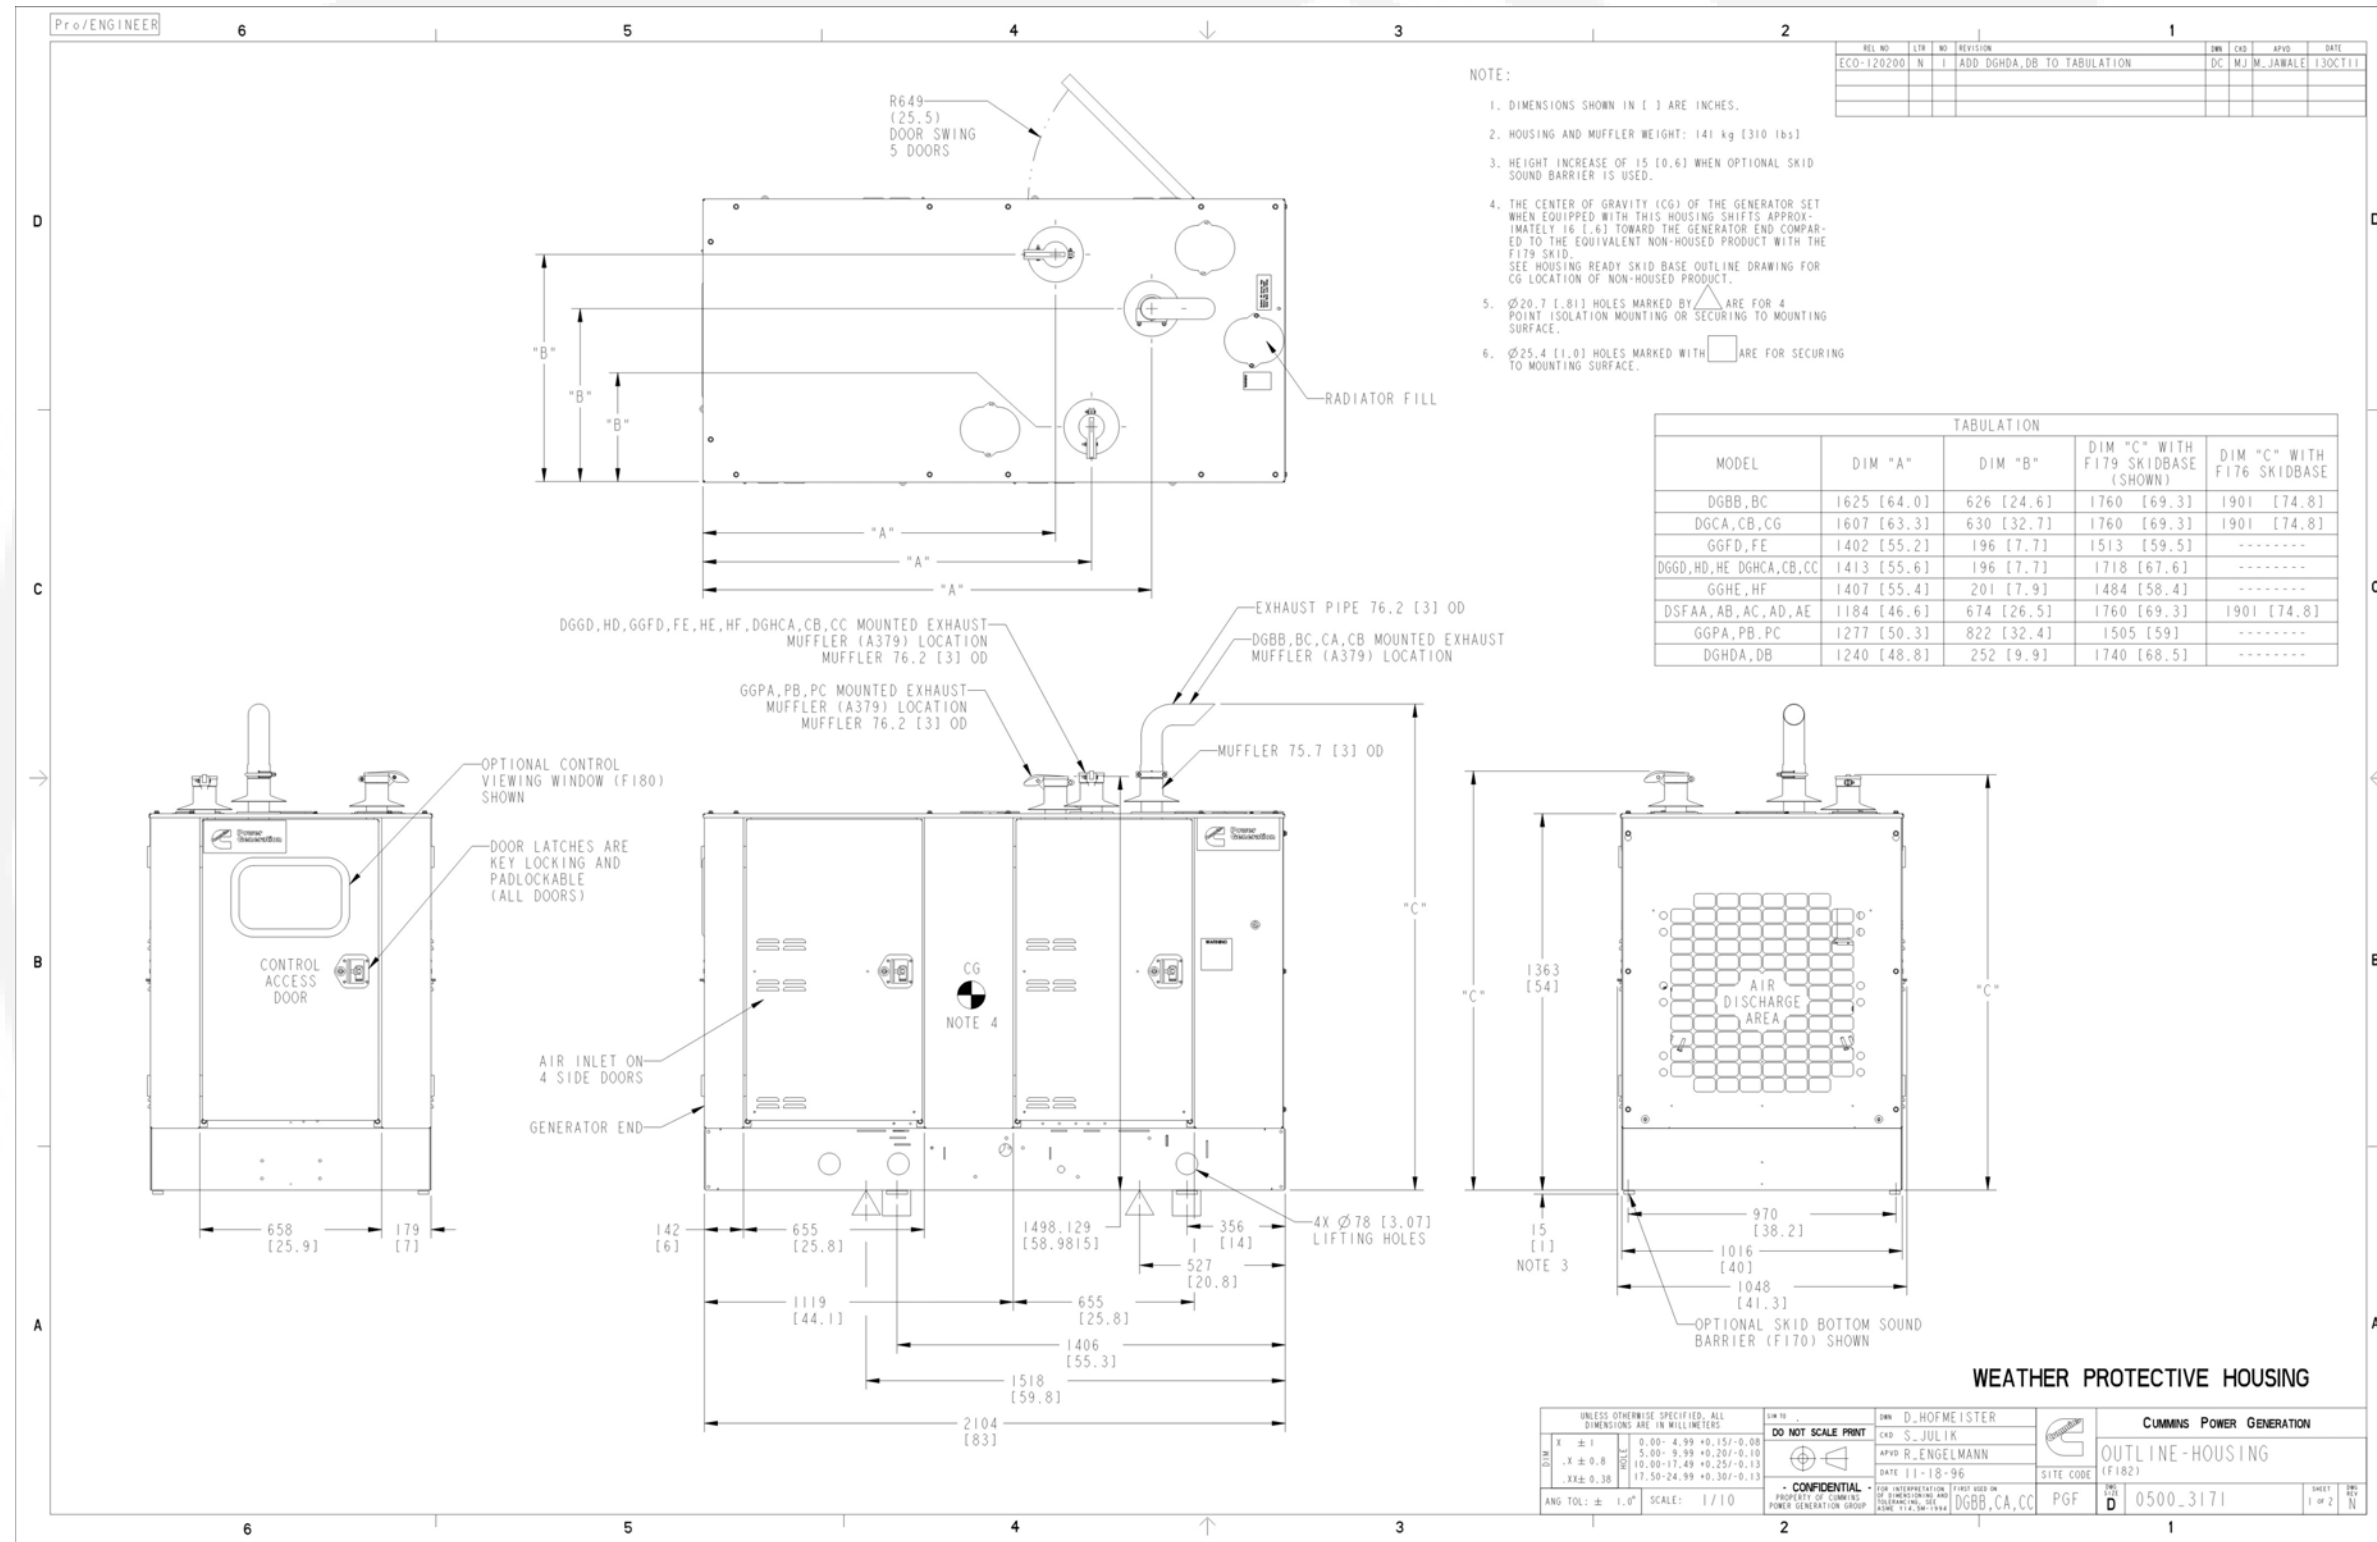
OUTLINE DRAWING (500-3171) SHEET 1
